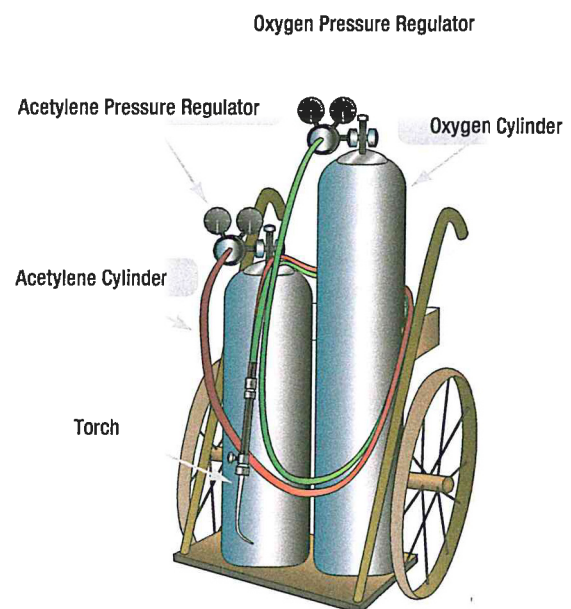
Portable oxy-acetylene welding outfit.
